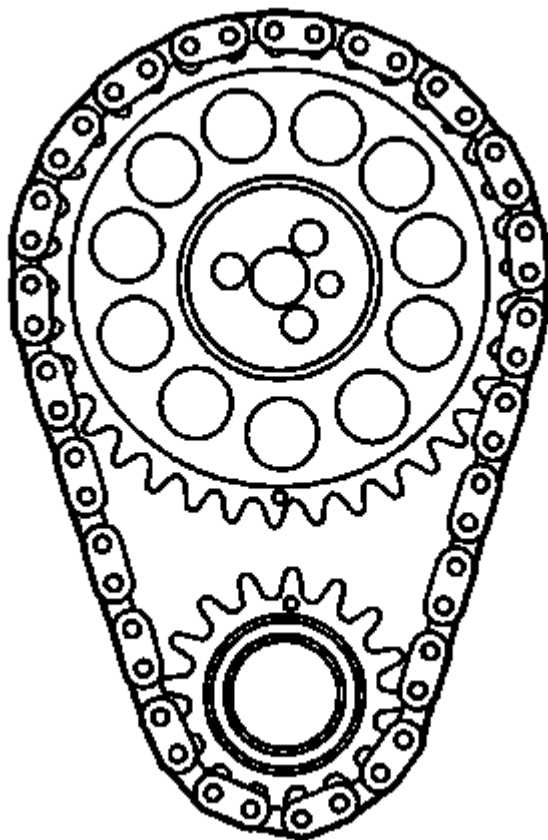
View Of Camshaft & Crankshaft Sprocket Timing Marks
